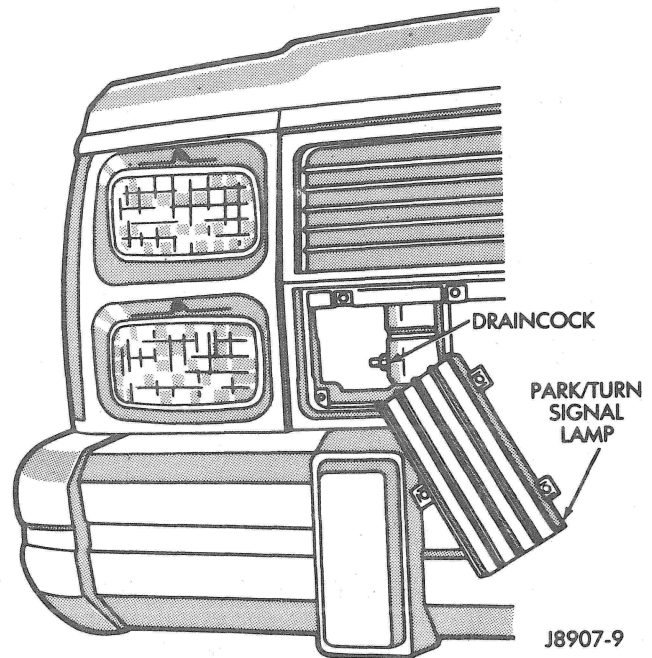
Draincock Access—Wagoneer with 4.0L Engine
